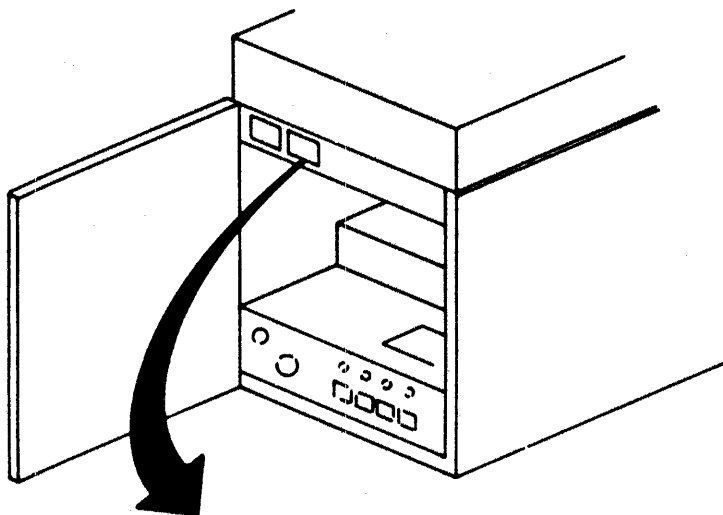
Drive Assemblies (Sheet 2 of 2)
